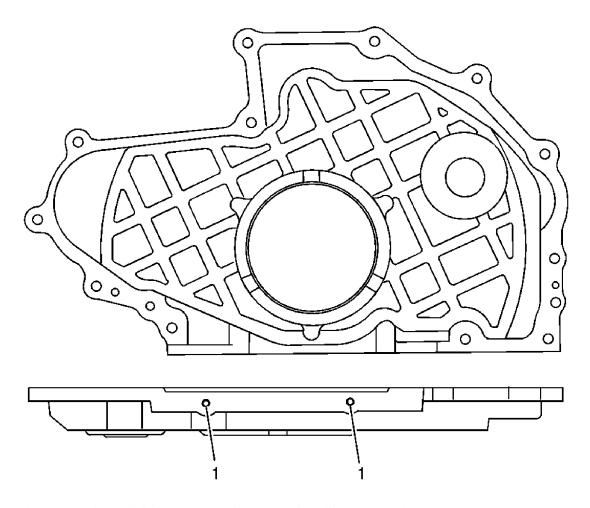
View Of Crankshaft Rear Oil Seal Housing Courtesy of GENERAL MOTORS CORP.
